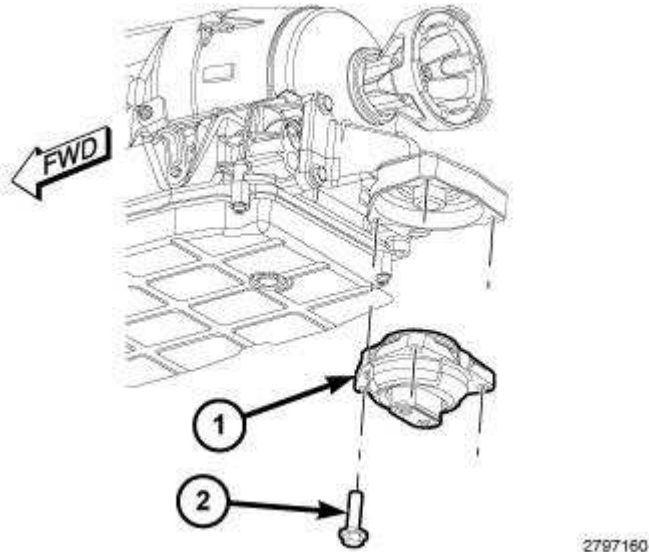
Rear Engine Mount Isolator & Bolts (4x2)
